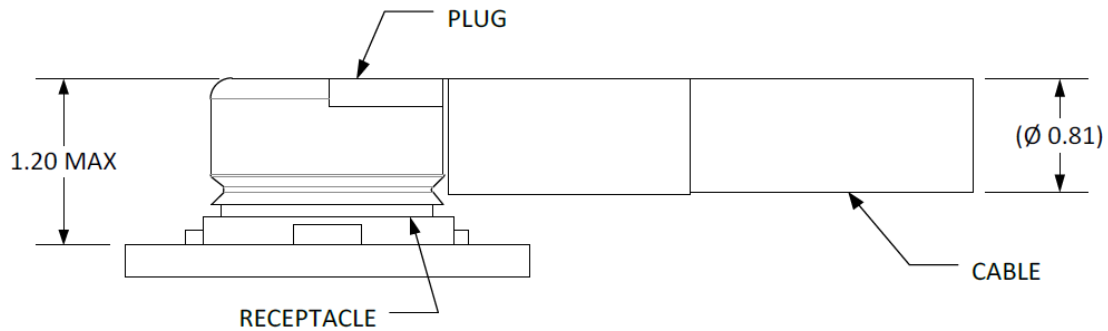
Space Factor of Mated Connectors (Ø 0.81 mm Coaxial Cables) (Unit: mm)
